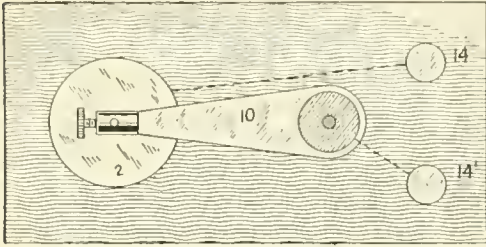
Plan view showing the mounting of the spring brass that holds the needle
